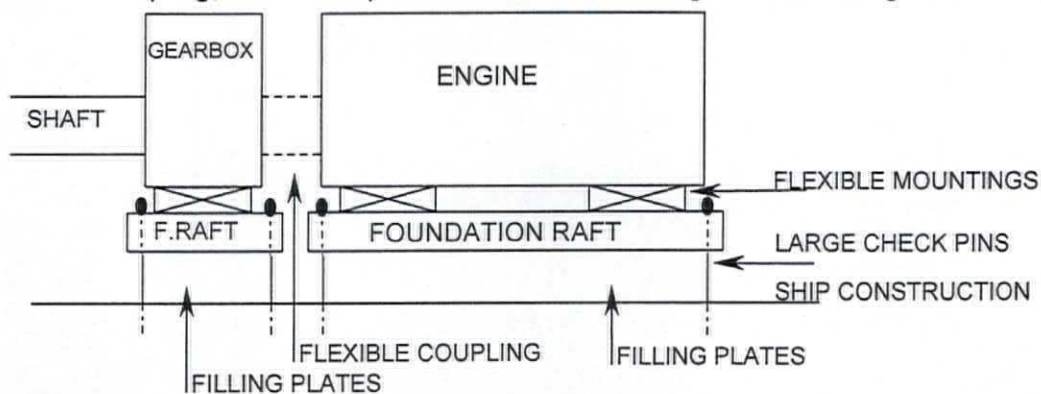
Example of a mounting system where engine and gearbox are separately mounted
